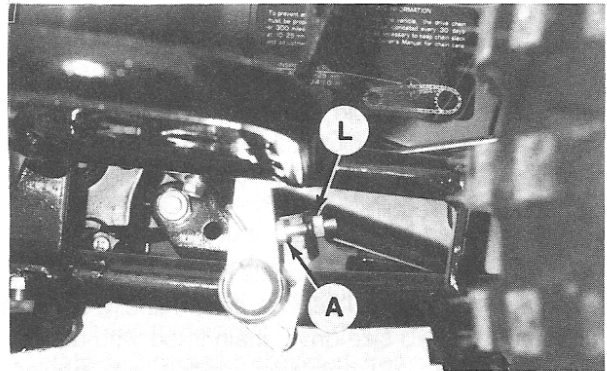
Loosen locknut (L) and turn screw (A) to adjust brake pedal height.
